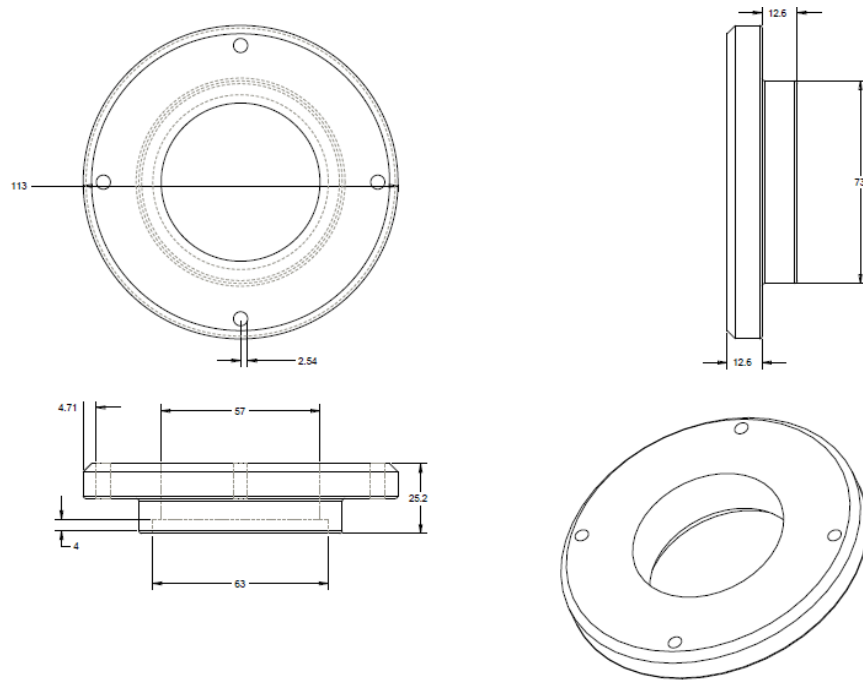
Engineering drawing of custom built lower glass platen (all dimensions are in mm).
